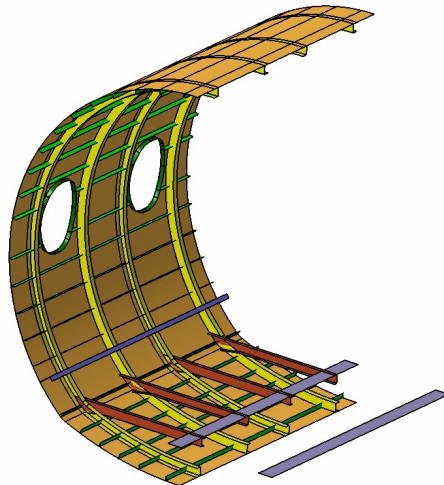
The CATIA model of DBV1. The assembly is representing the half geometry with 2 rail parts.
